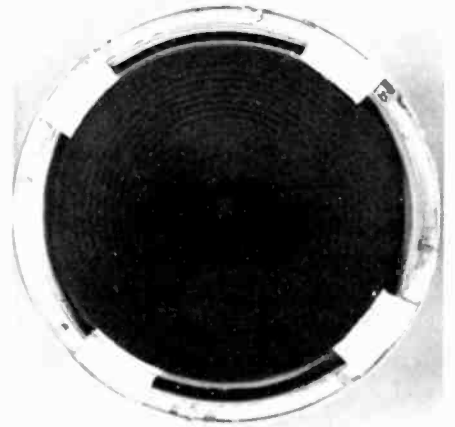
Four strips of the soft chamois are glued in place to hold the cone centered.
